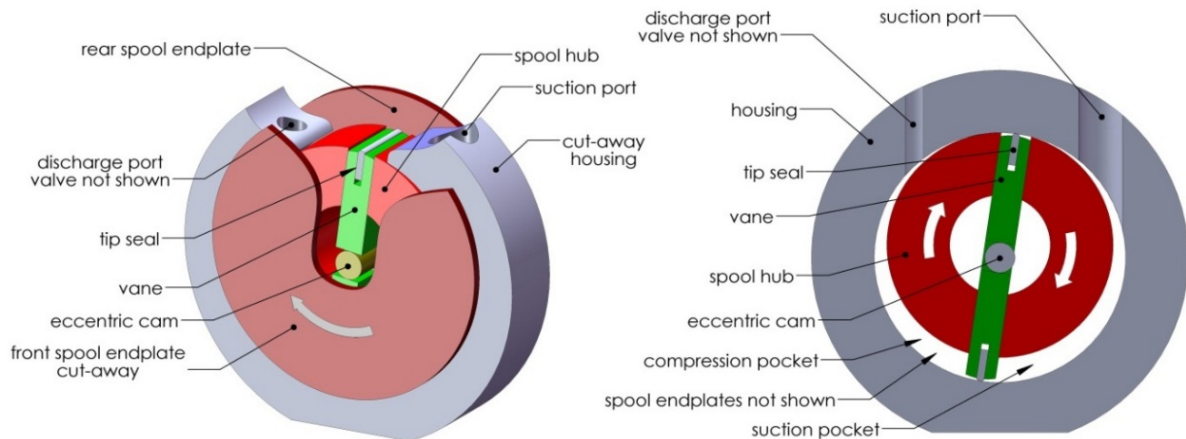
Cutaway view of rotating spool compressor mechanism with key components highlighted.
